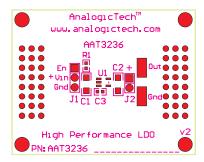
Evaluation board top side silk screen layout / assembly drawing
